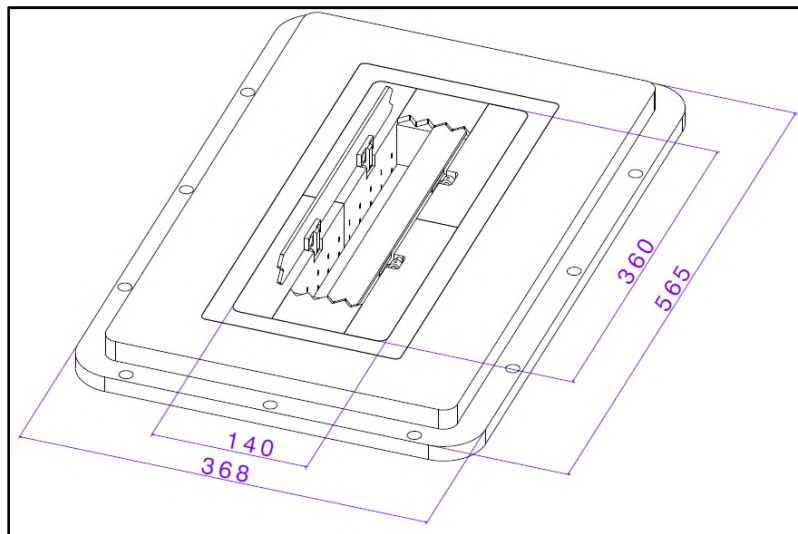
Rig global layout with cavity and doors installed. The cavity is depicted with one door open and one door closed. Dimensions are in millimetres.
